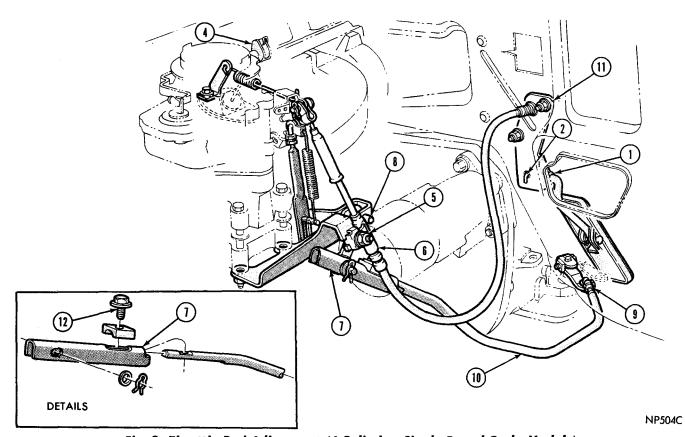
Throttle Rod Adjustment (6 Cylinder, Single Barrel Carb. Models)
